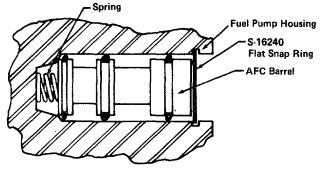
G-21. AFC Barrel, with Spring, in Fuel Pump Housing
